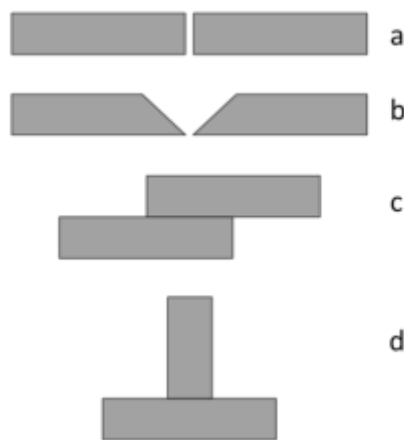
Types of Welded Joint – (a) Square butt joint, (b) V butt joint, (c) Lap joint, (d) T-joint [2]
